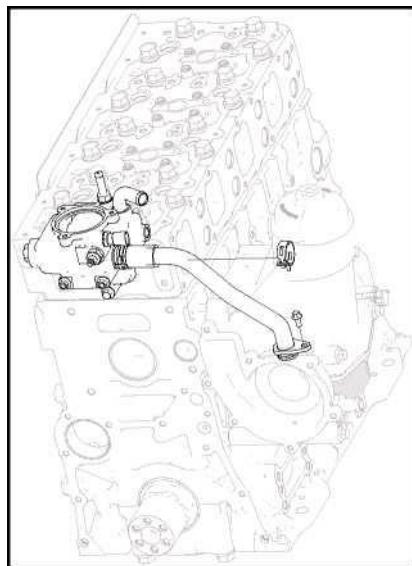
Drawing for analysis of bolts and clamps of a small recirculation water return pipe
